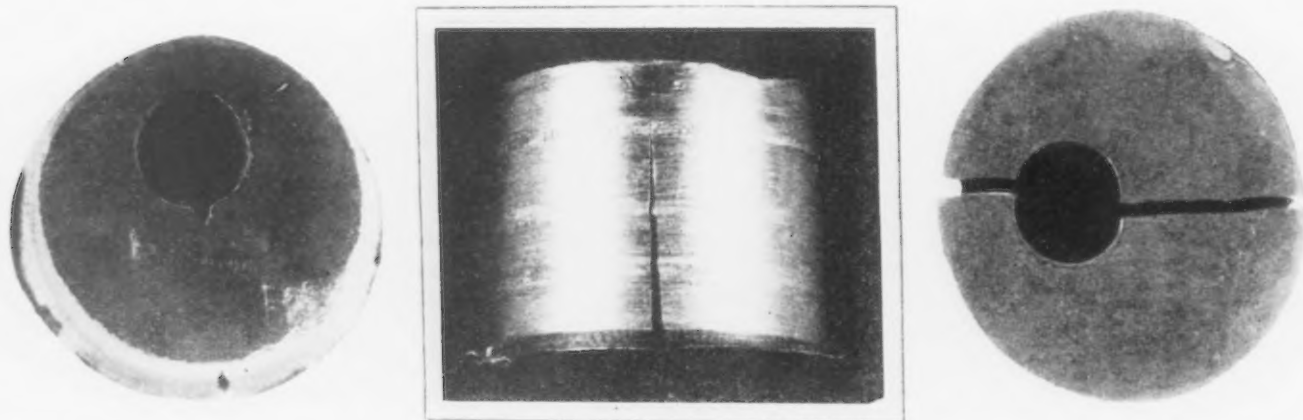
Plug Specimen Cut from Arc Welded Test Shell C Where Broken at Tapped Hole for Pressure Gage. At left is view of outer surface of plate; in center is the side of the plug specimen, and at right the fracture shows open to a considerable distance on each side of the hole
